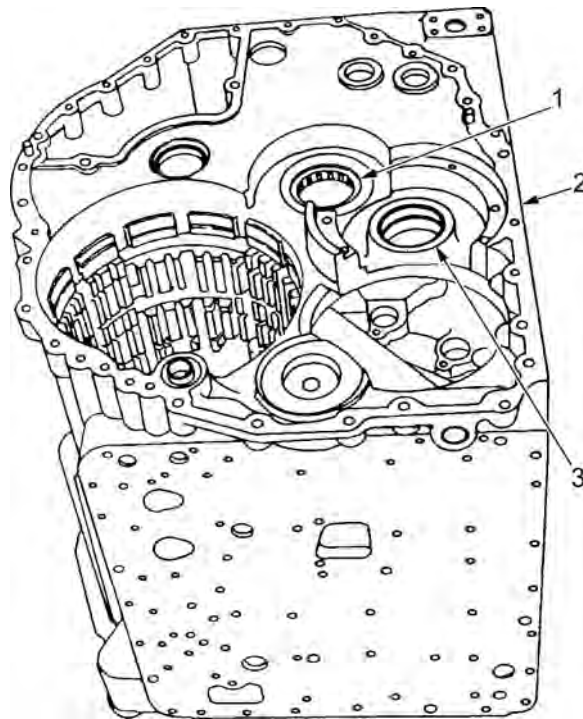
Center Housing, Left Side, Bearing Race, Outer Race, and Rollers Removal.
